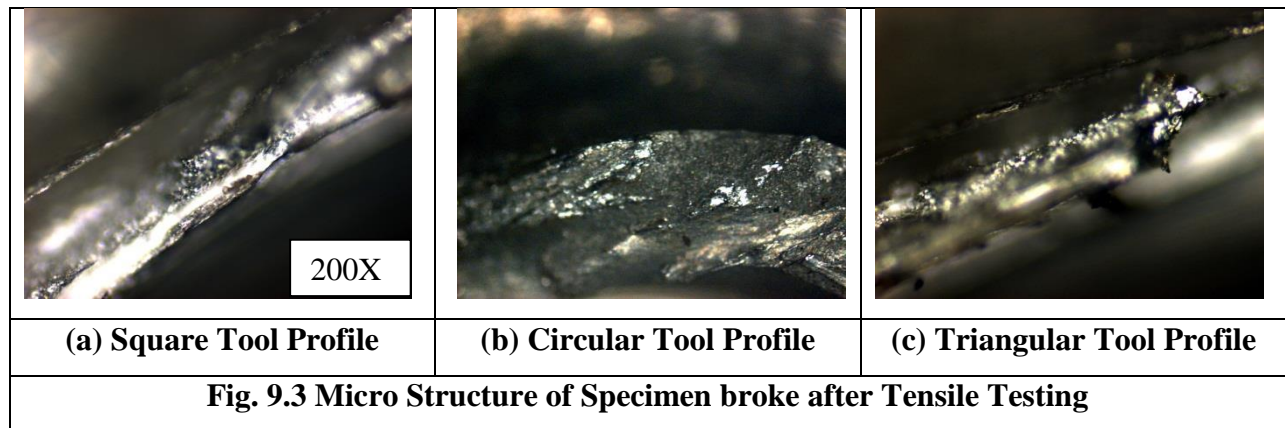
shows the micro structure of friction stir spot welded specimen after broken out by tensile testing. From Fig. 9.3(a) this specimen is welded by using square tool and easily seen the ductile fracture on the welded edge of the specimen. Fig. 9.3(b) this specimen is welded by using circular tool and it is easily seen from the figure that edge having less surface damage. Fig.
